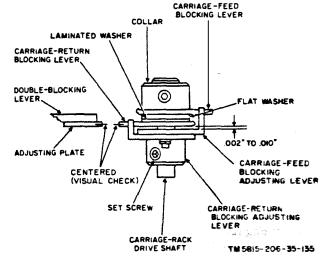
Carriage-feed blocking adjusting lever and carriage-return blocking-lever clearance (TT-4B/TG).
